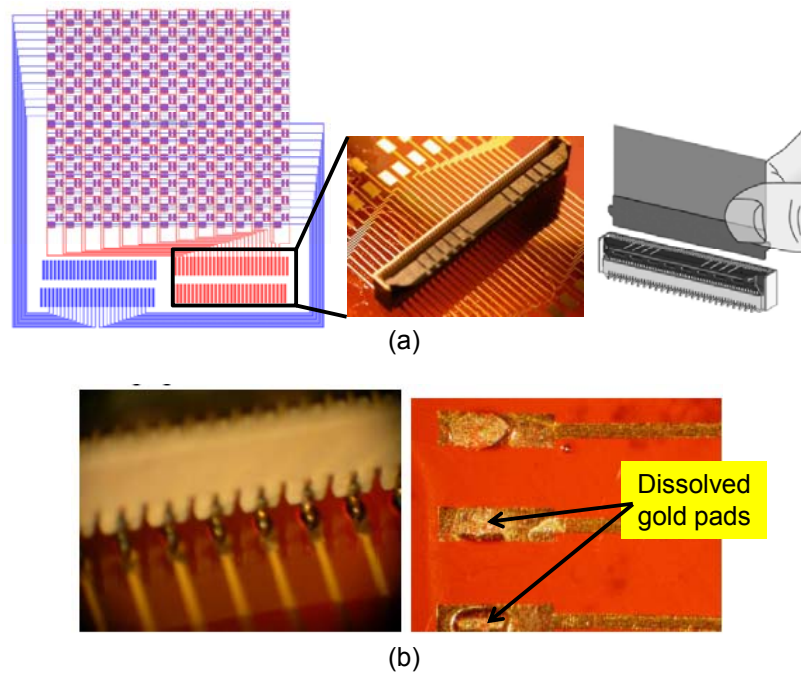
Integration of the connector to the FTI and issues during integration. (a) Modified layout to incorporate vertical flex cable connector. (b) Soldering the connector caused dissolving gold pad on the FTI due to excessive heat.
